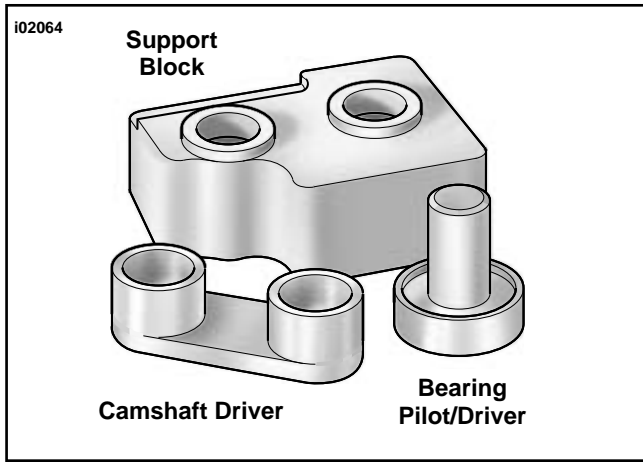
Camshaft/Camshaft Bearing Remover/Installer (P/N HD-43644)
